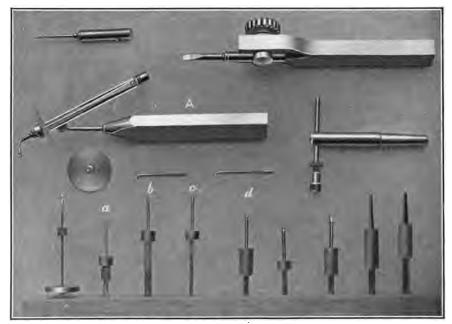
TOOLS FOR BORING MASTER PLATES
